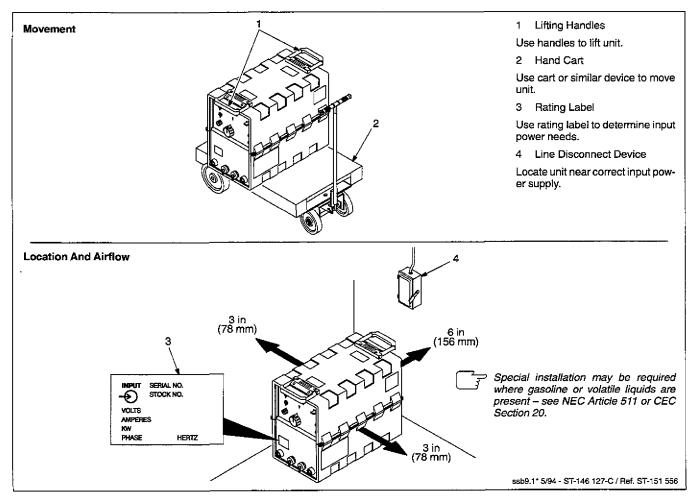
Location and Movement Of Welding Power Source
